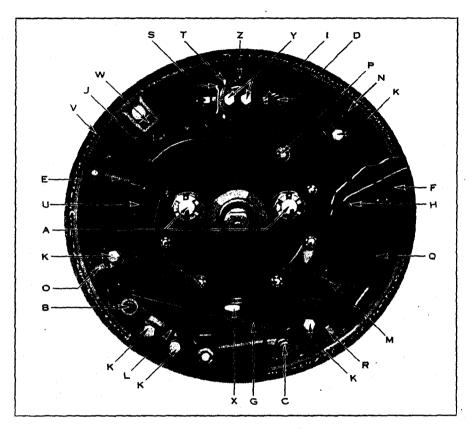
V-63 Front Wheel Brake (L. H.)
